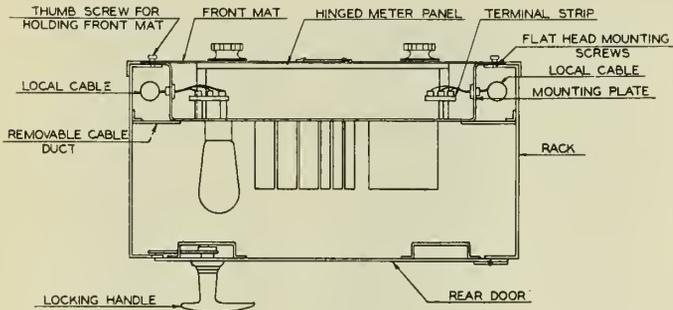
Cross Section Through Typical Depressed Panel Type Unit Mounted on Cabinet Type Rack.
